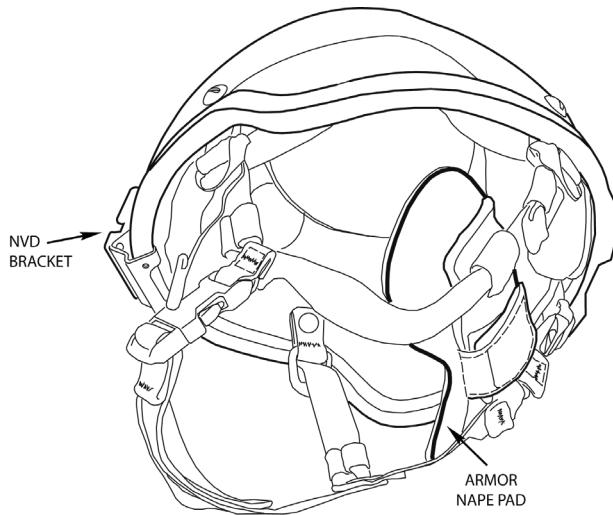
Ballistic Nape Pad Installed on H-Back Retention System.
